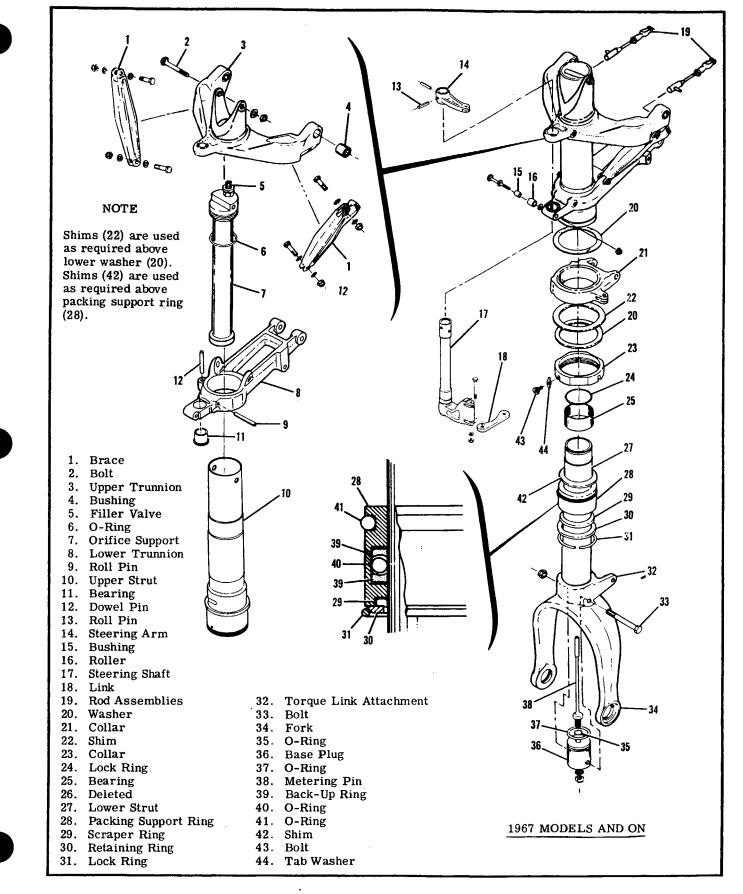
A-14. Nose Gear Shock Strut (Sheet 2 of 2)
